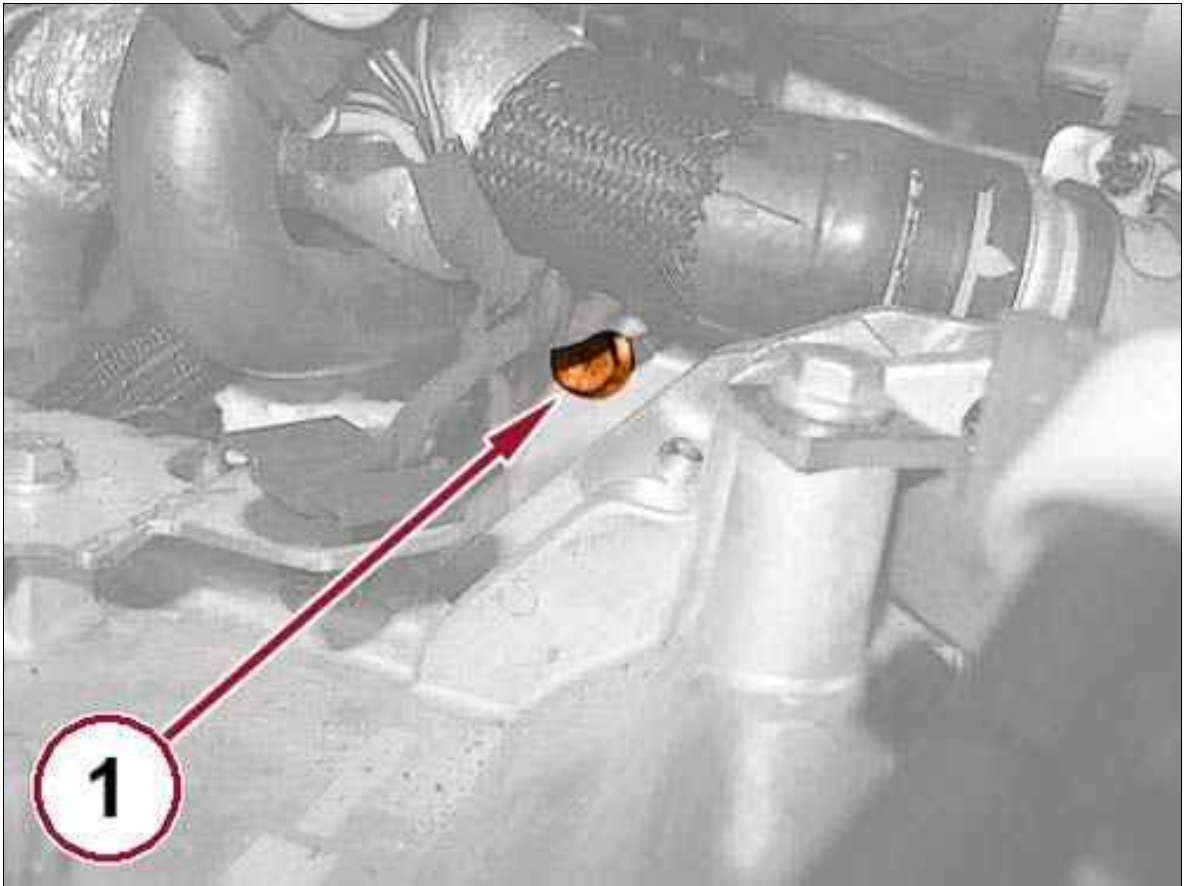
Intake Side Upper Transmission To Engine Block Bolt
